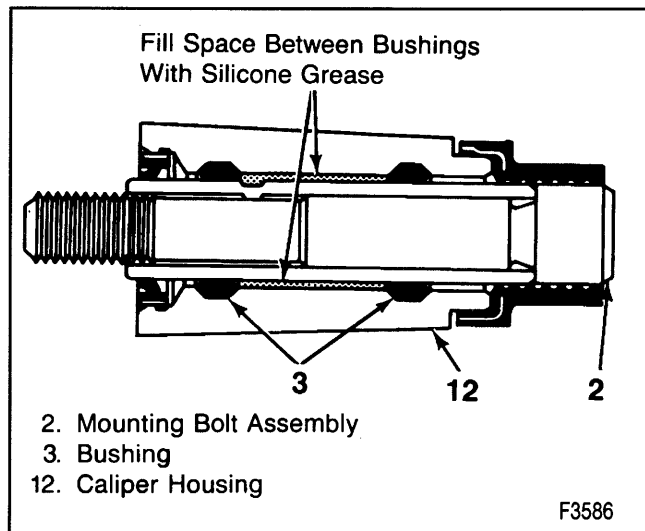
Mounting Bolt Lubrication (Delco 3400)
